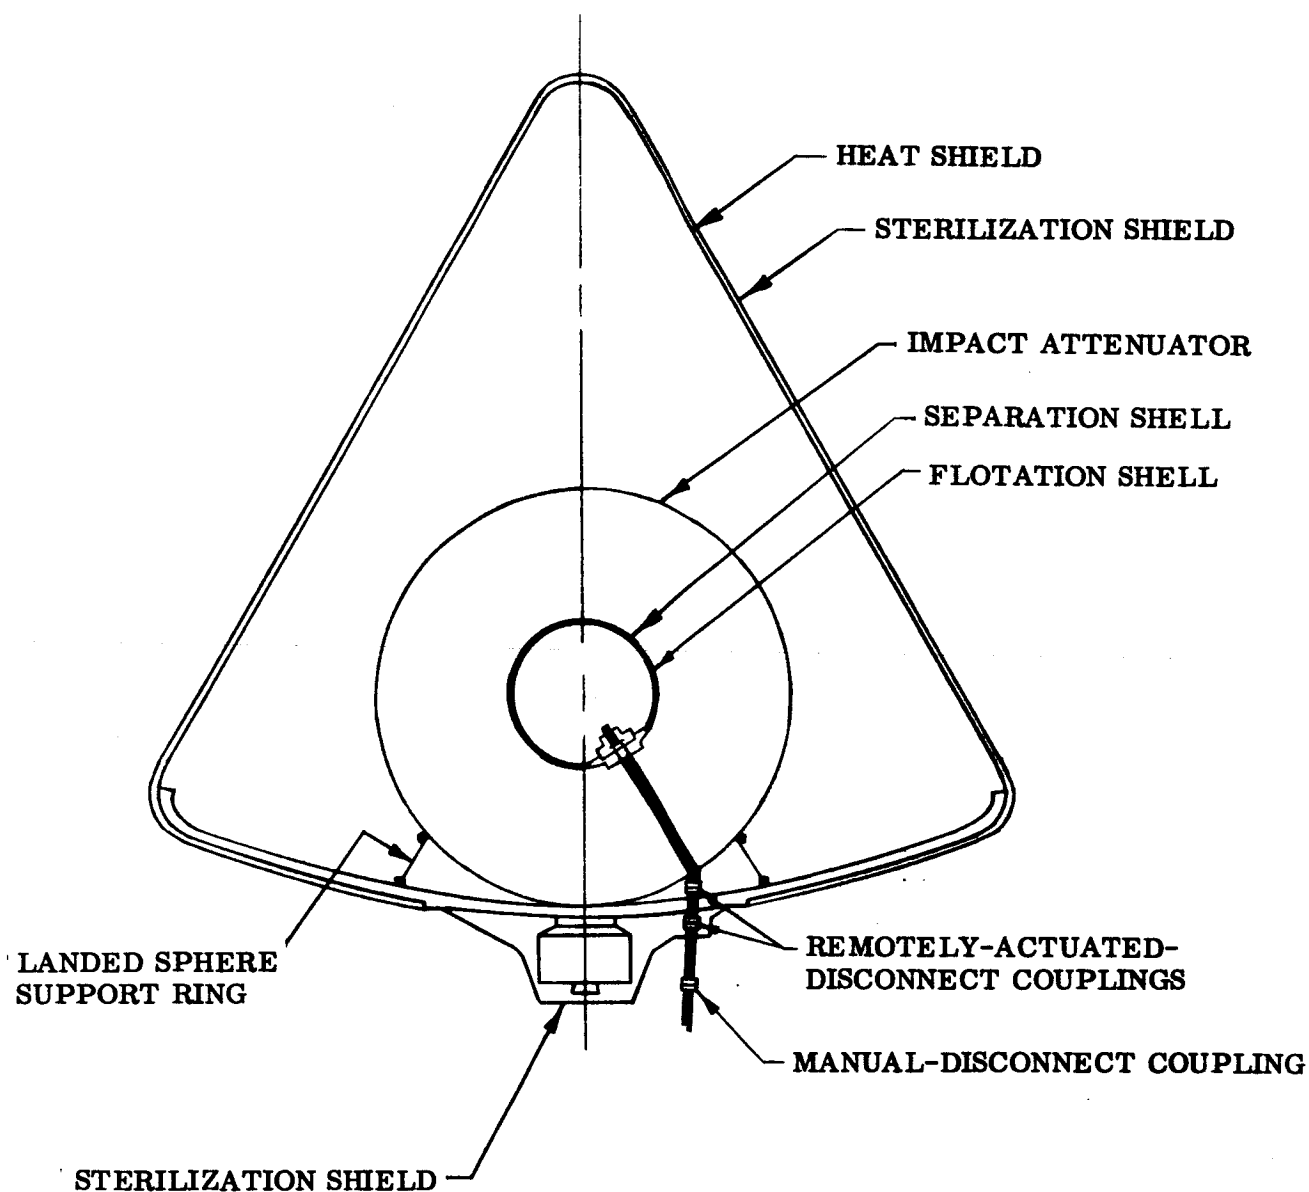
Coolant Supply Line and Coolant Line Disconnect System
